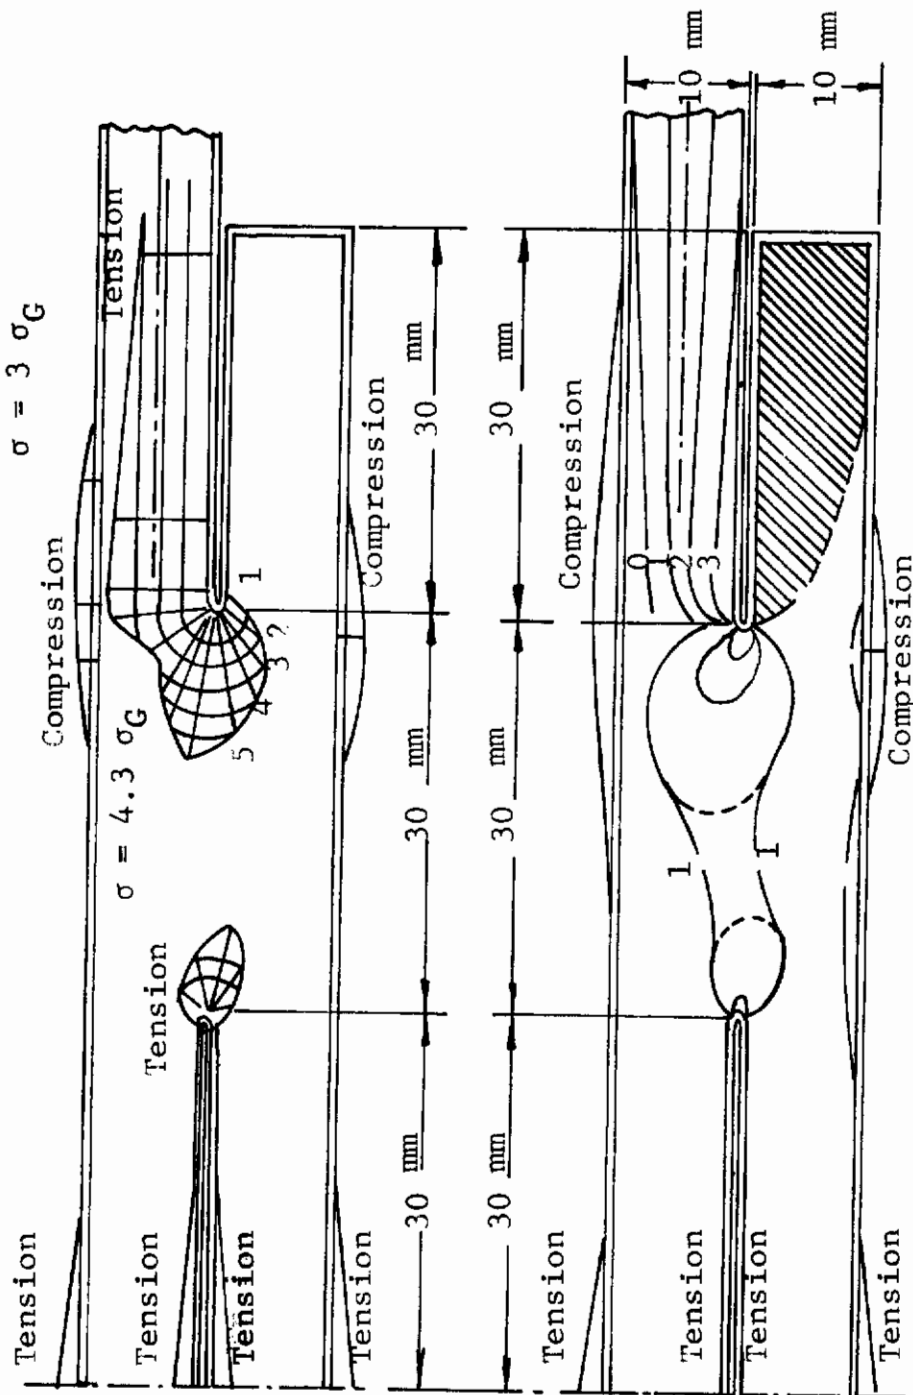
ACROSS THE THICKNESS STRESSES FOR SINGLE-LAP, DOUBLE-WELD JOINT
